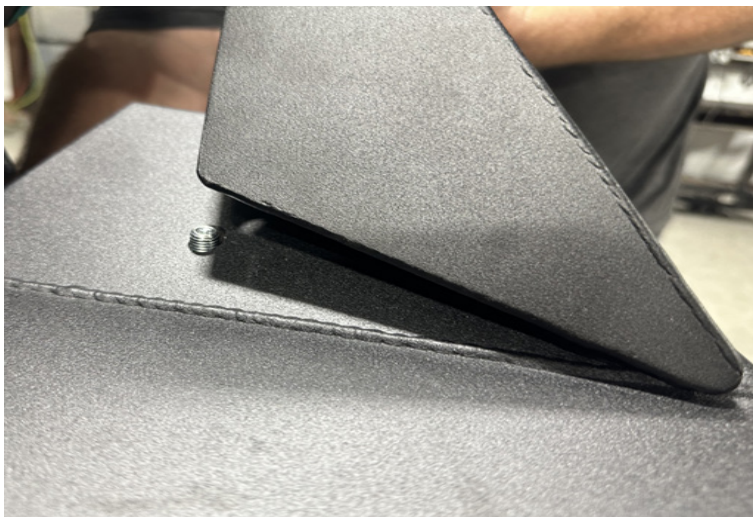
If Bull Bar option was purchased, install Wings using a 13mm Wench
